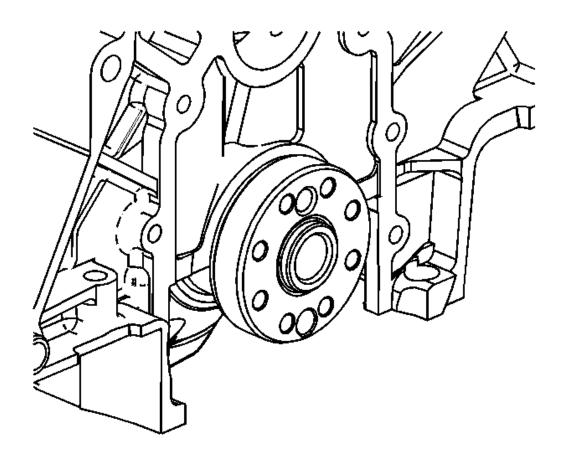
View Of Crankshaft Sealing Surface Courtesy of GENERAL MOTORS CORP.
